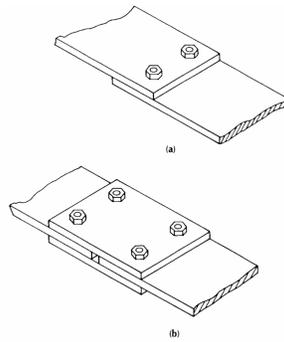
Illustrations of two mechanical-fastener, shear-loaded joints: (a) lap-joint, (b) butt-type (or double-lap) joint.⁶⁶
